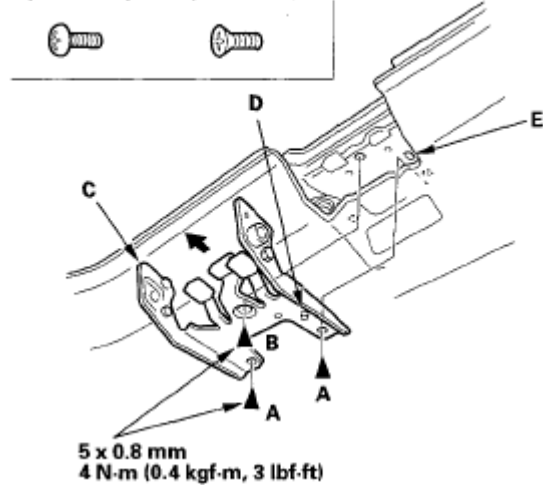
Identifying Latch Bracket Screws With Torque Specification
